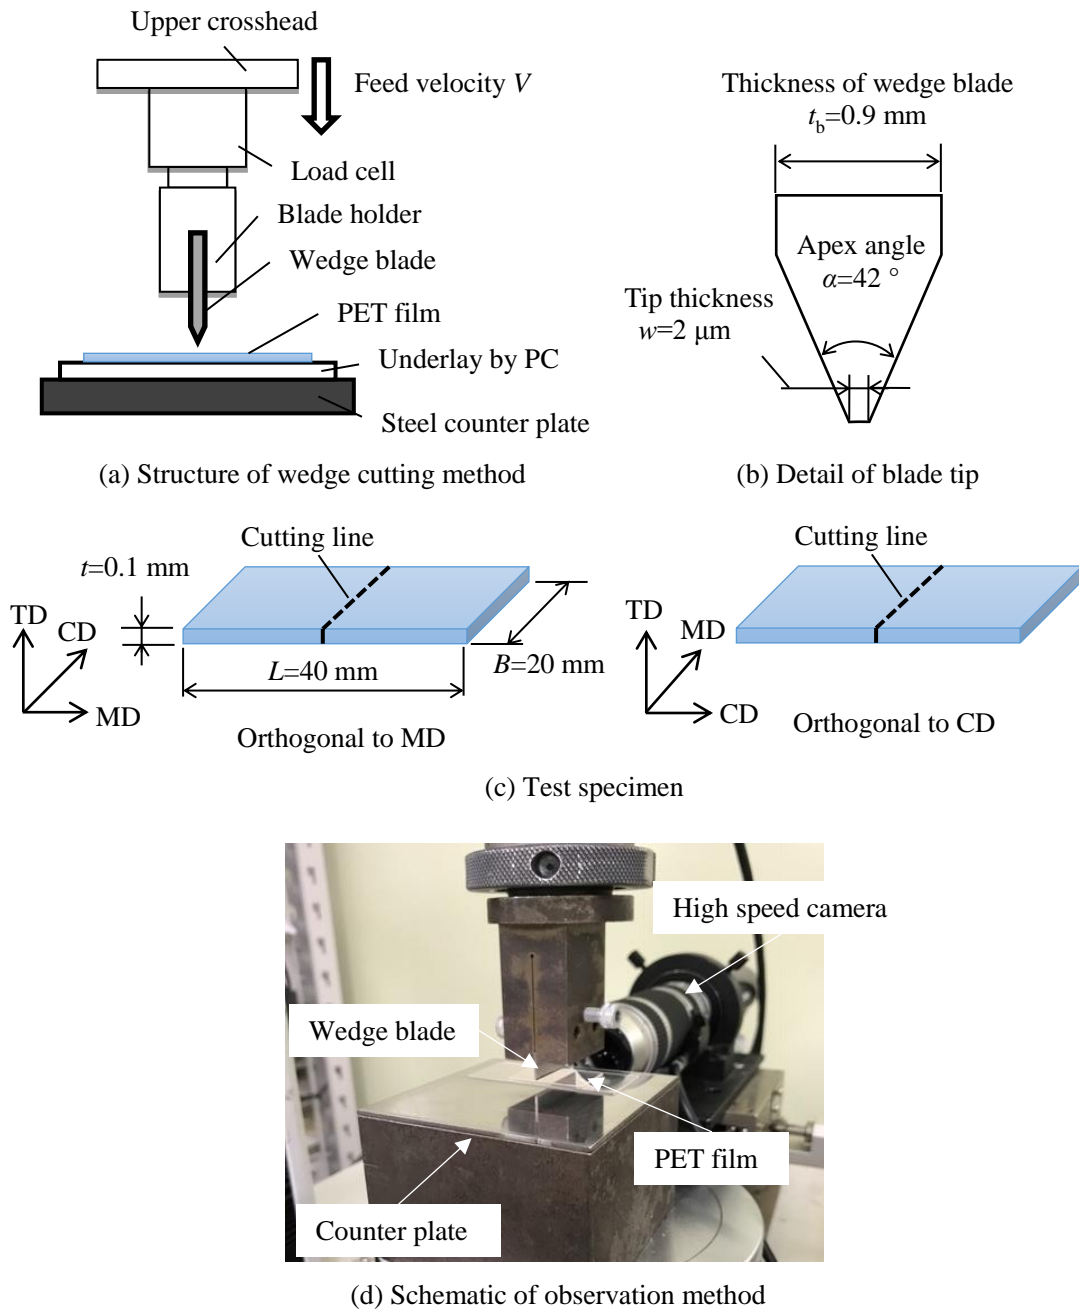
Schematic of wedge cutting test apparatus and test specimen.
